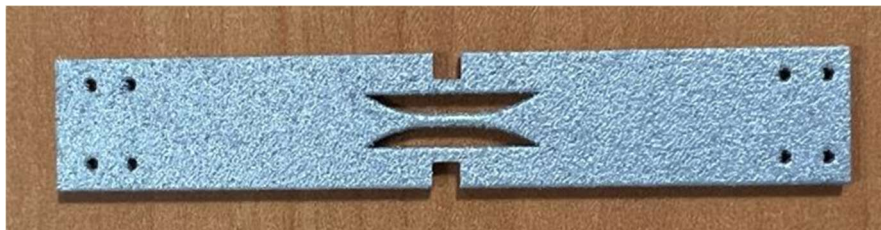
Single ligament test specimen manufactured from AlSi10Mg
